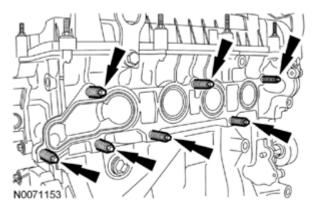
Locating Cylinder Head Studs Courtesy of FORD MOTOR CO.
